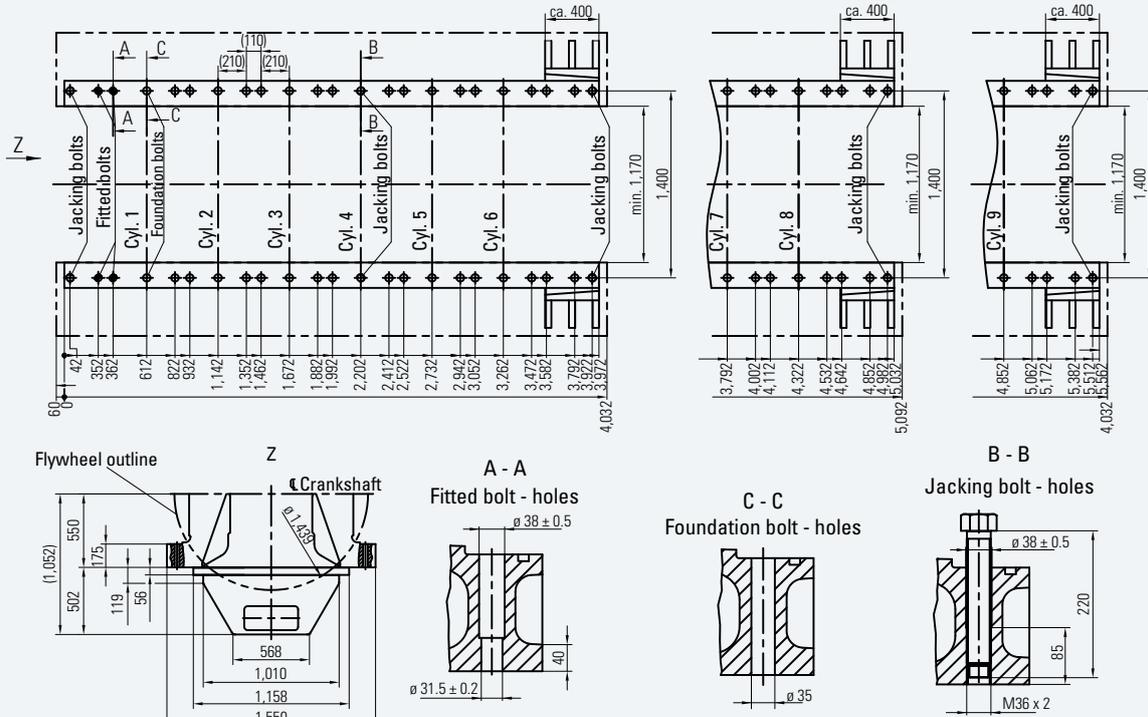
Dimension [mm] of foundation dry sump pan
